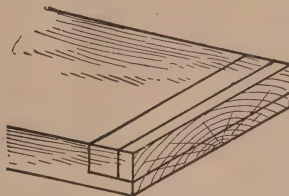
Setting Out Drawer Front for Double Lap Dovetail
